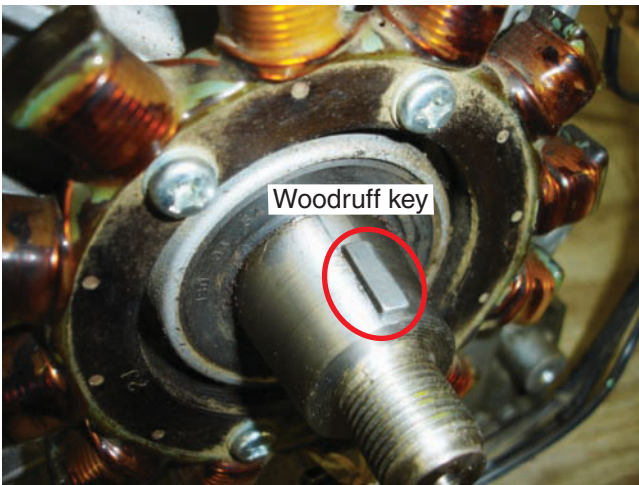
Alternator rotors are held in place generally by a woodruff key.
